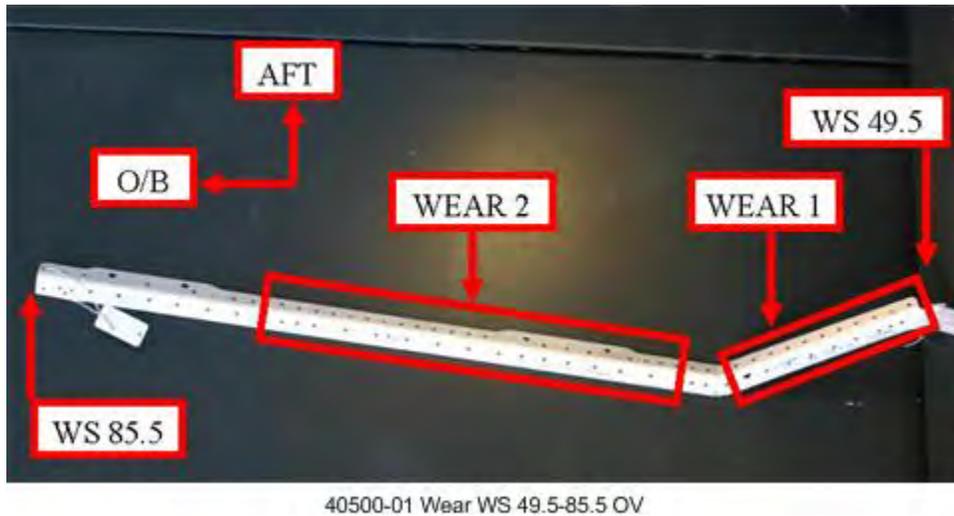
Location of Wear 1 and 2 on the Right Wing Rear Spar Assembly Main Gear Forward WS 49.5 Through WS 85.5
